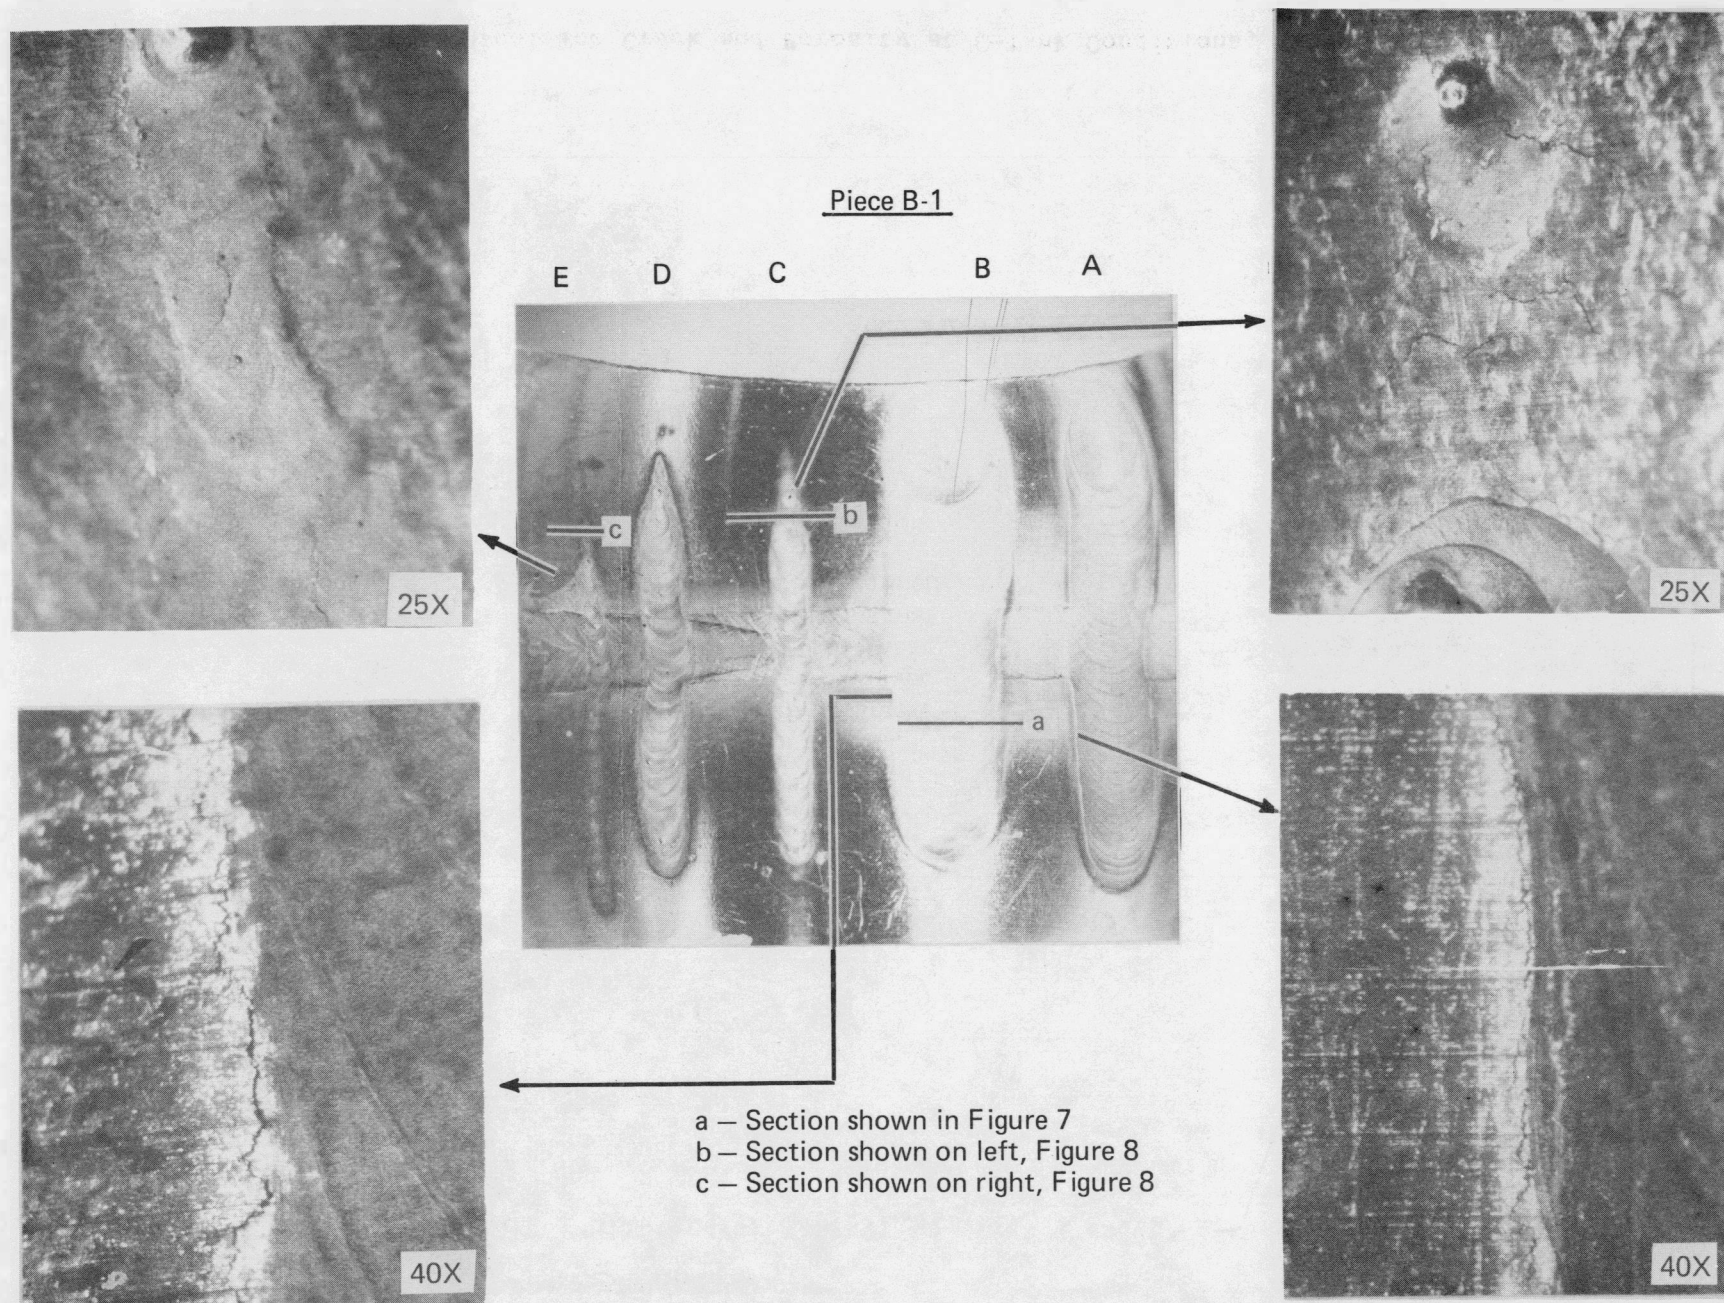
Cracking Produced by Low Heat Welds, Piece B-1
